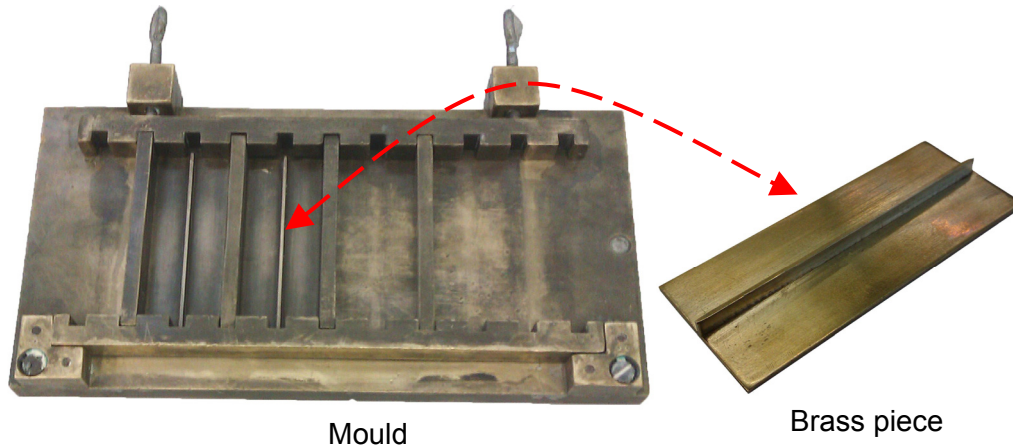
Picture of the brass mould for preparing DT specimens and the brass piece with an inverted T-shaped cross-section to add guiding grooves.
